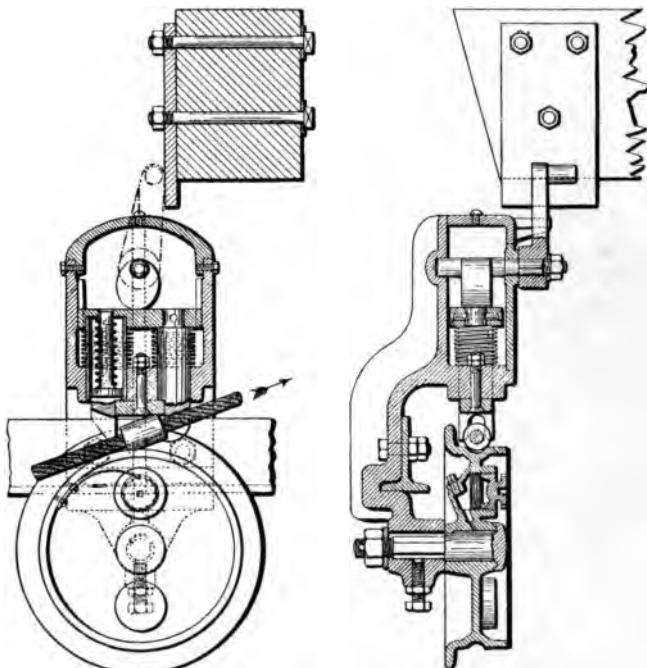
Claw Locking Grip or Coupling for Steep Gradients.
